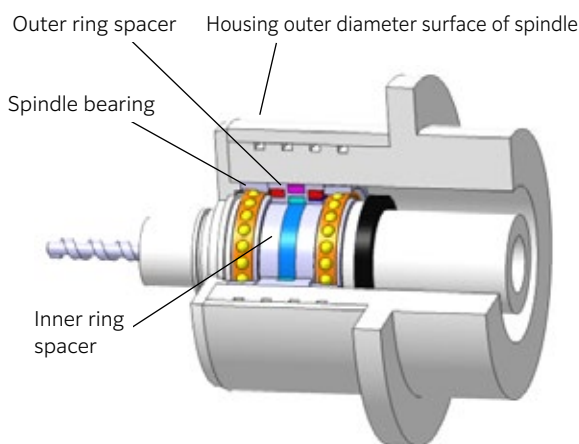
Application example of the sensor integrated bearing unit to the machine tool spindle
